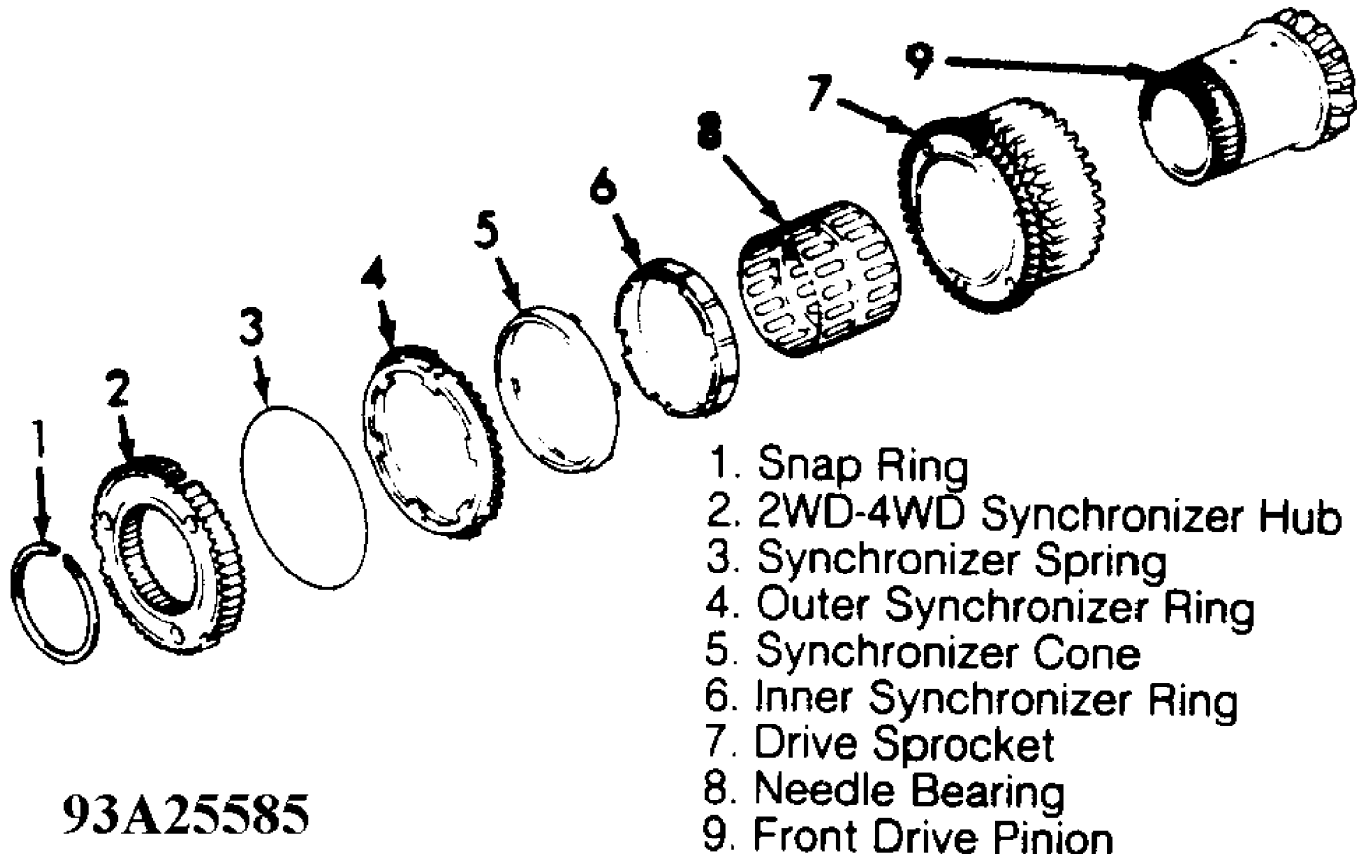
Exploded View Of 2WD-4WD Synchronizer (Montero)
